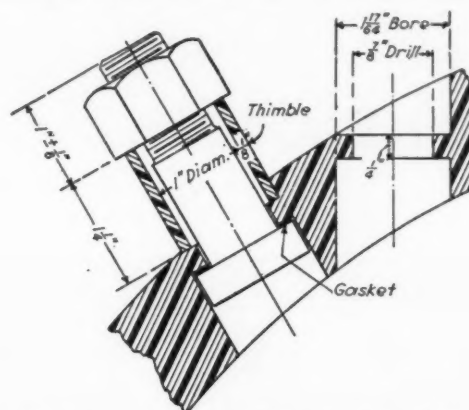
SHOWING METHOD OF PLUGGING TUBE HOLES
